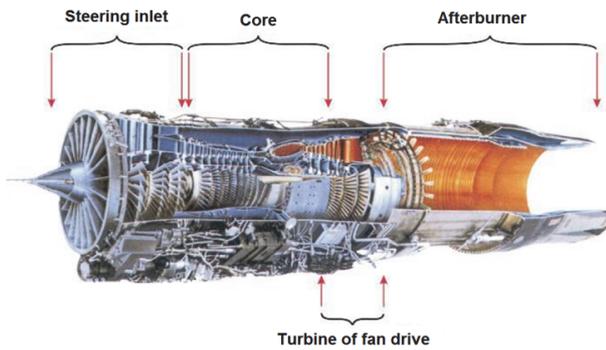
Cross section of the engine Pratt & Whitney F100-PW-229 [12].
